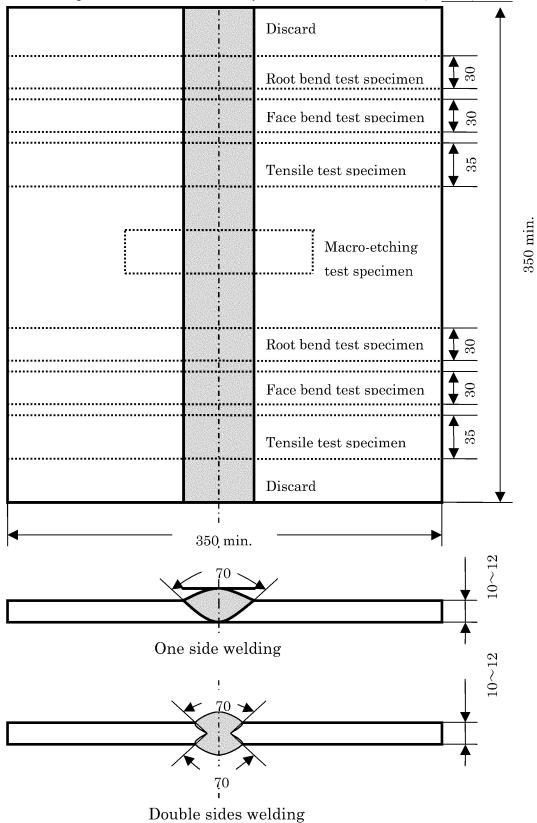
Butt Weld Test Assembly with a Thickness of 10 to 12 mm (Unit: mm)
